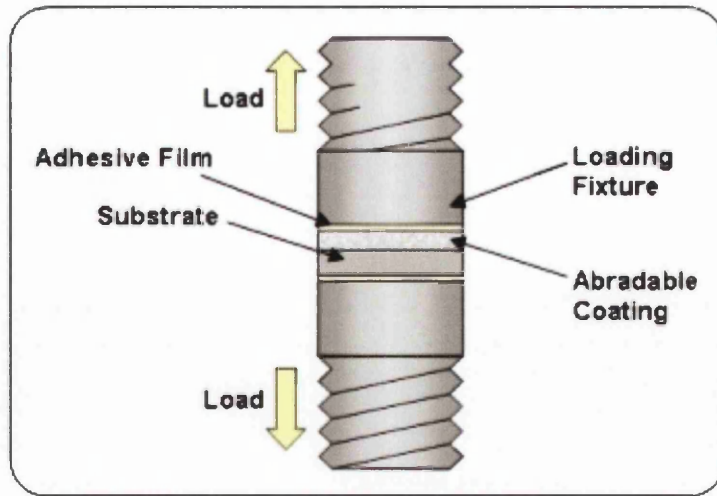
Loading fixture and test piece arrangement for Tensile Bond Strength Test
